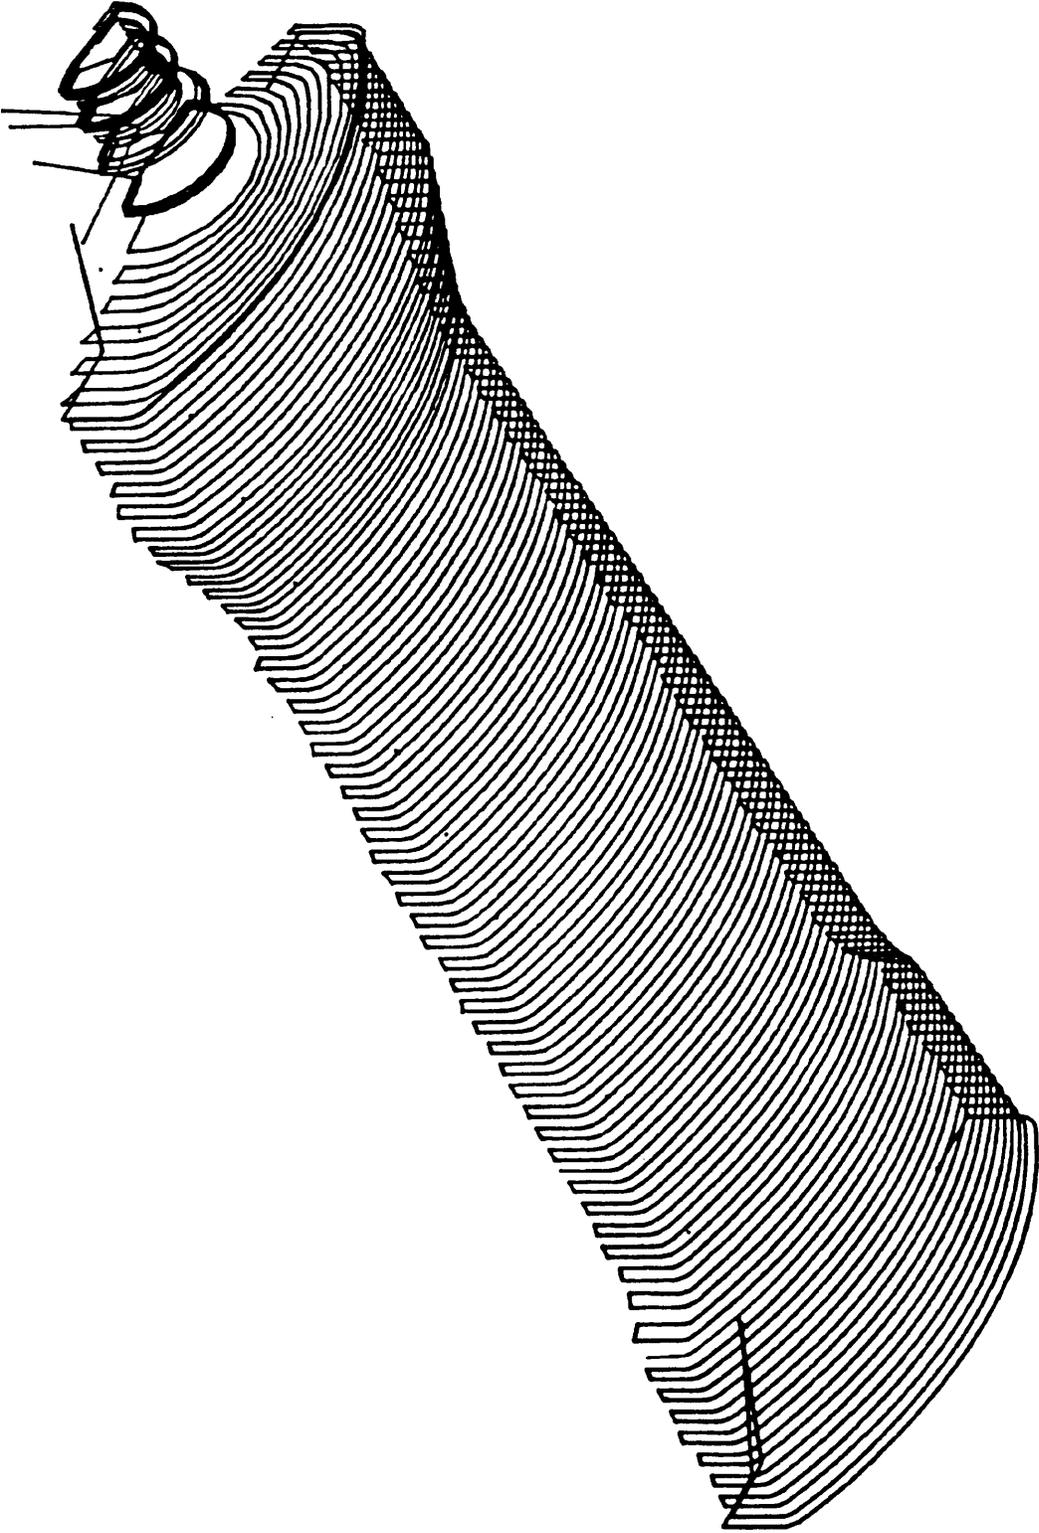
The toolpaths for the finish machining of the bottle mould
